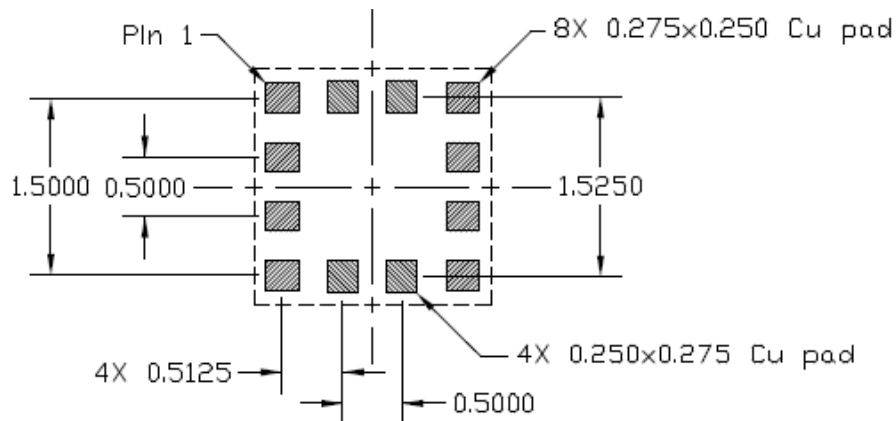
Example of a PCB land pattern for the 2 x 2 mm LGA package (Top view)
